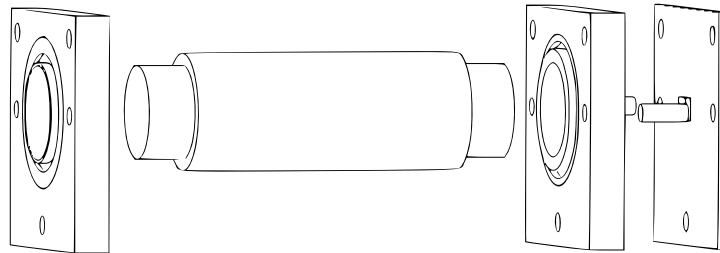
Mechanical arrangement for angle sensing. The same assembly is used for all pendulums.
